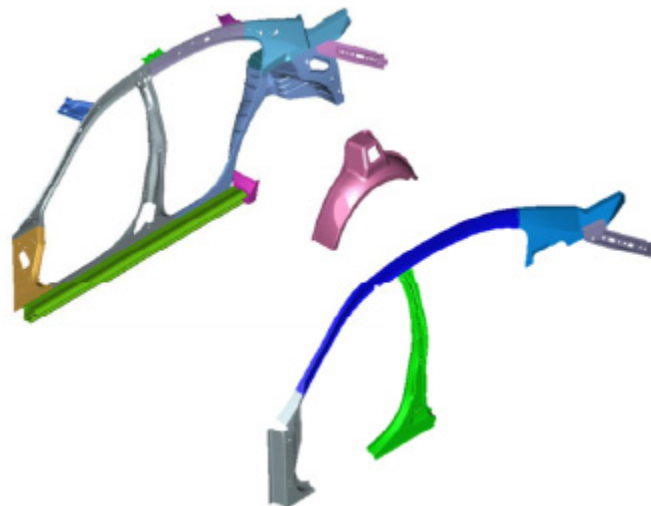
Body side inner subassembly of the laser welded structure
